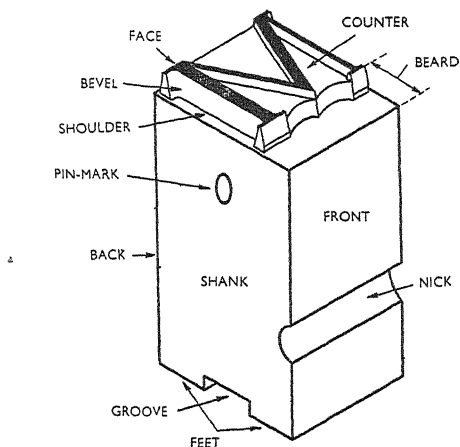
THE PARTS OF A TYPE CHARACTER.
